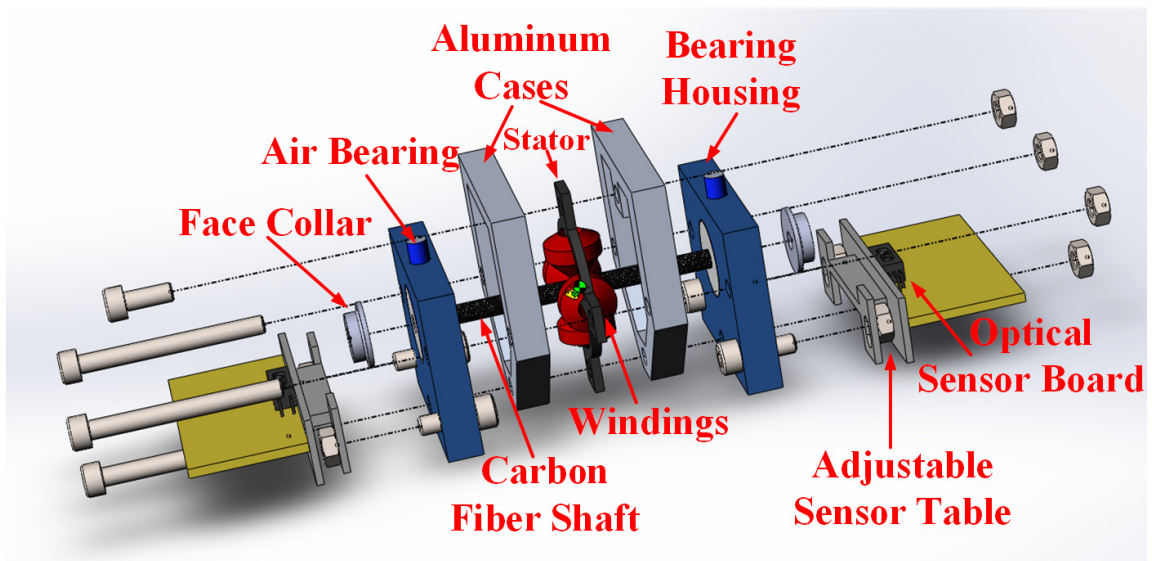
Final assembly of the proposed ultra-high speed SRM.
